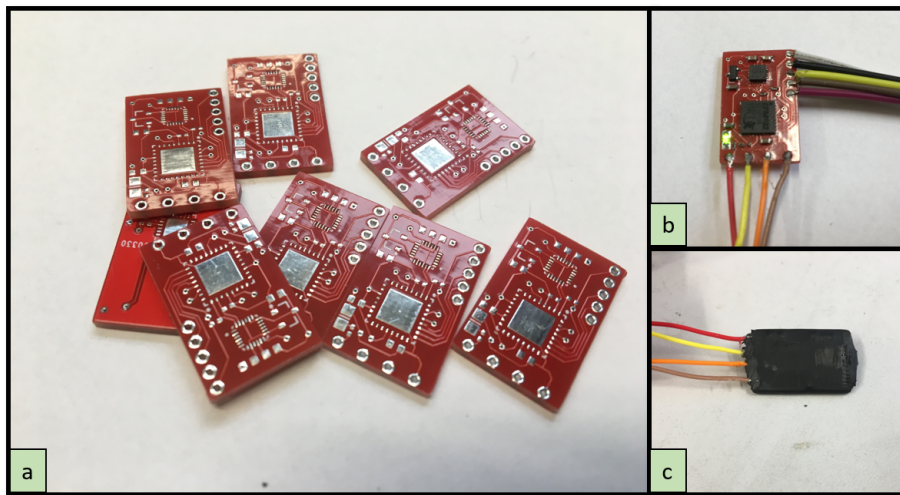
DH sensor card V1. a: Custom PCB's ordered from JLCPCB. b: V1 powered up with both USB and programming wires soldered on. c: V1 sealed with a heat-shrink-tube ready for testing.
